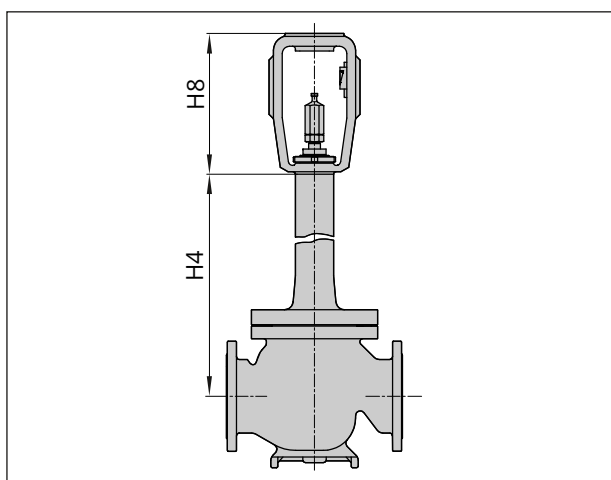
Type 3241 with insulating section or bellows seal, DN 200/NPS 8 and larger
